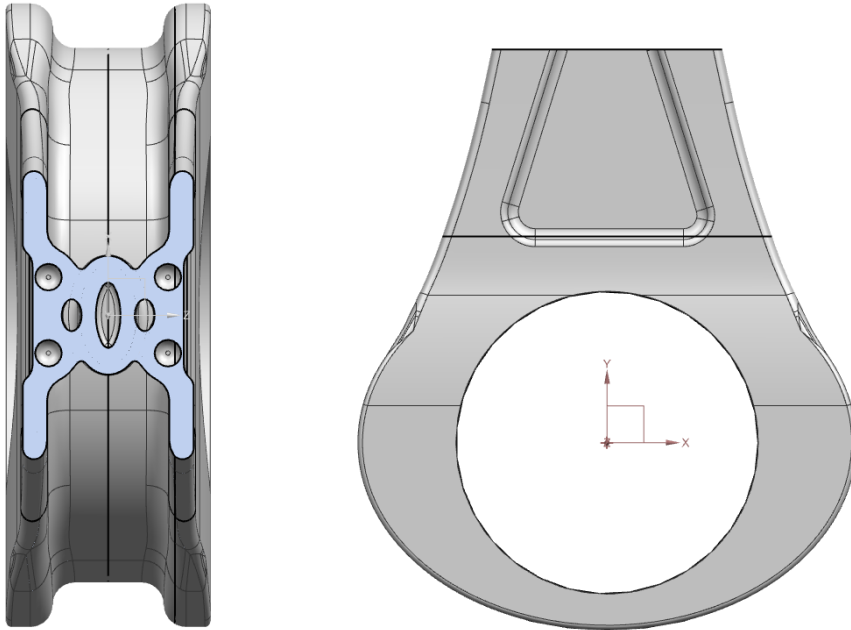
Cross-section of 2.0 beam; lower middle beam section.
